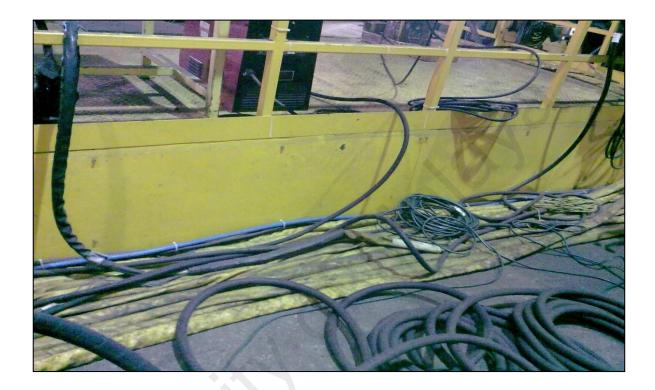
Bad wires and cables arrangement at welding workshop station
